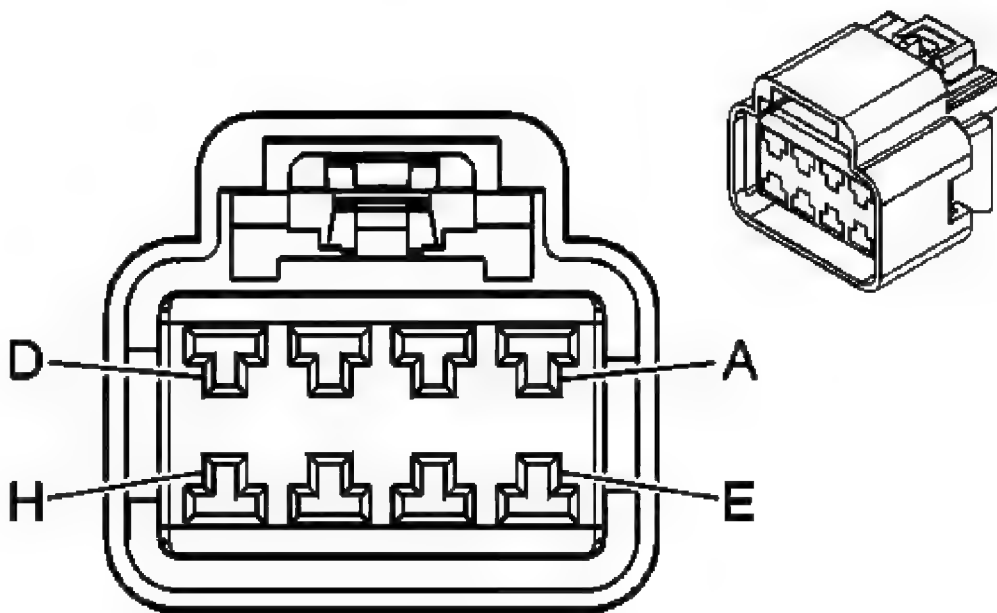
Passenger Seat Adjuster Switch (AG2) Connector End View
